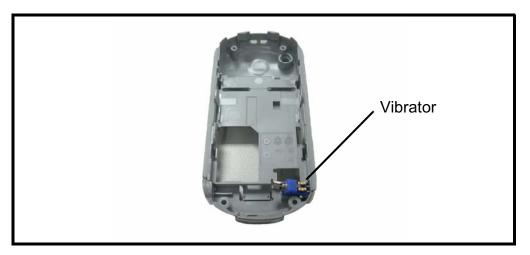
Gently pry up the vibrator motor on the inside of the back housing
